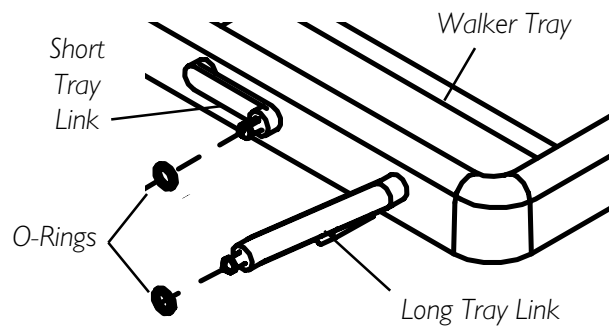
INSTALLING O-RINGS ONTO THE TRAY LINKS
